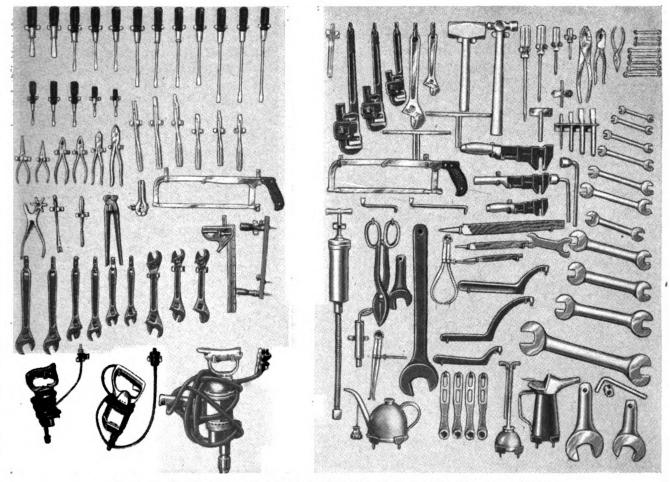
Tool boards. (Note use of brackets for mounting three-dimensional tools.)
